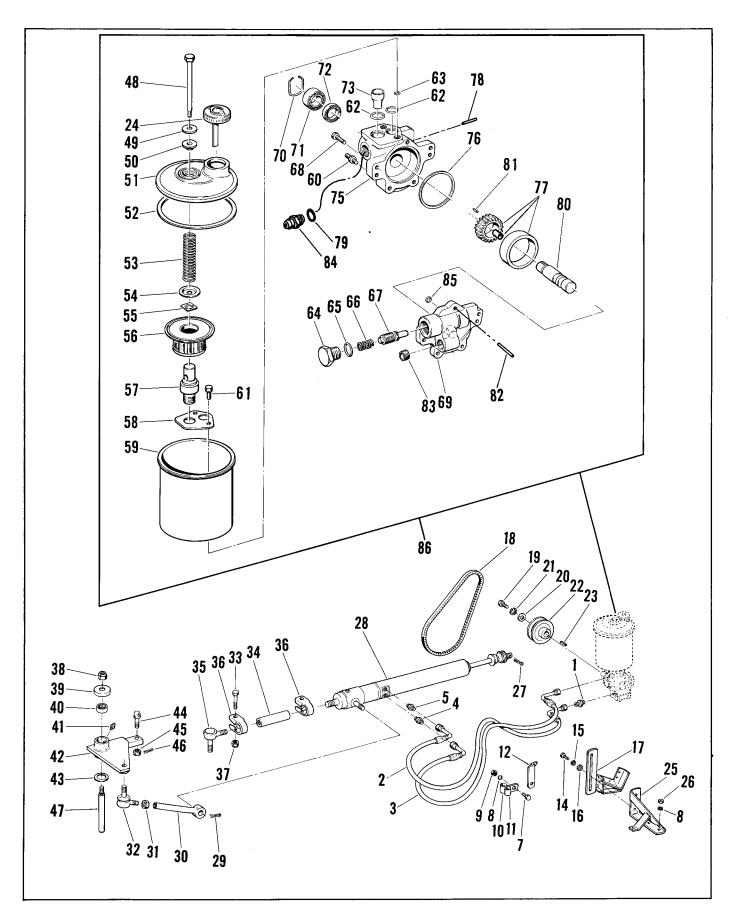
Power Steering Kit (Also Includes Parts Shown in Fig. 30).
